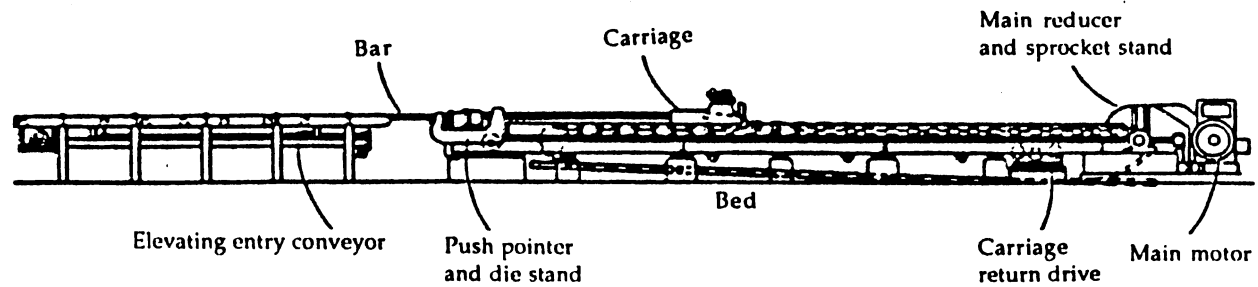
Typical Arrangement of a Drawbench for Producing Cold-Drawn Bars from Hot-Rolled Bars [Lange, 1985]
